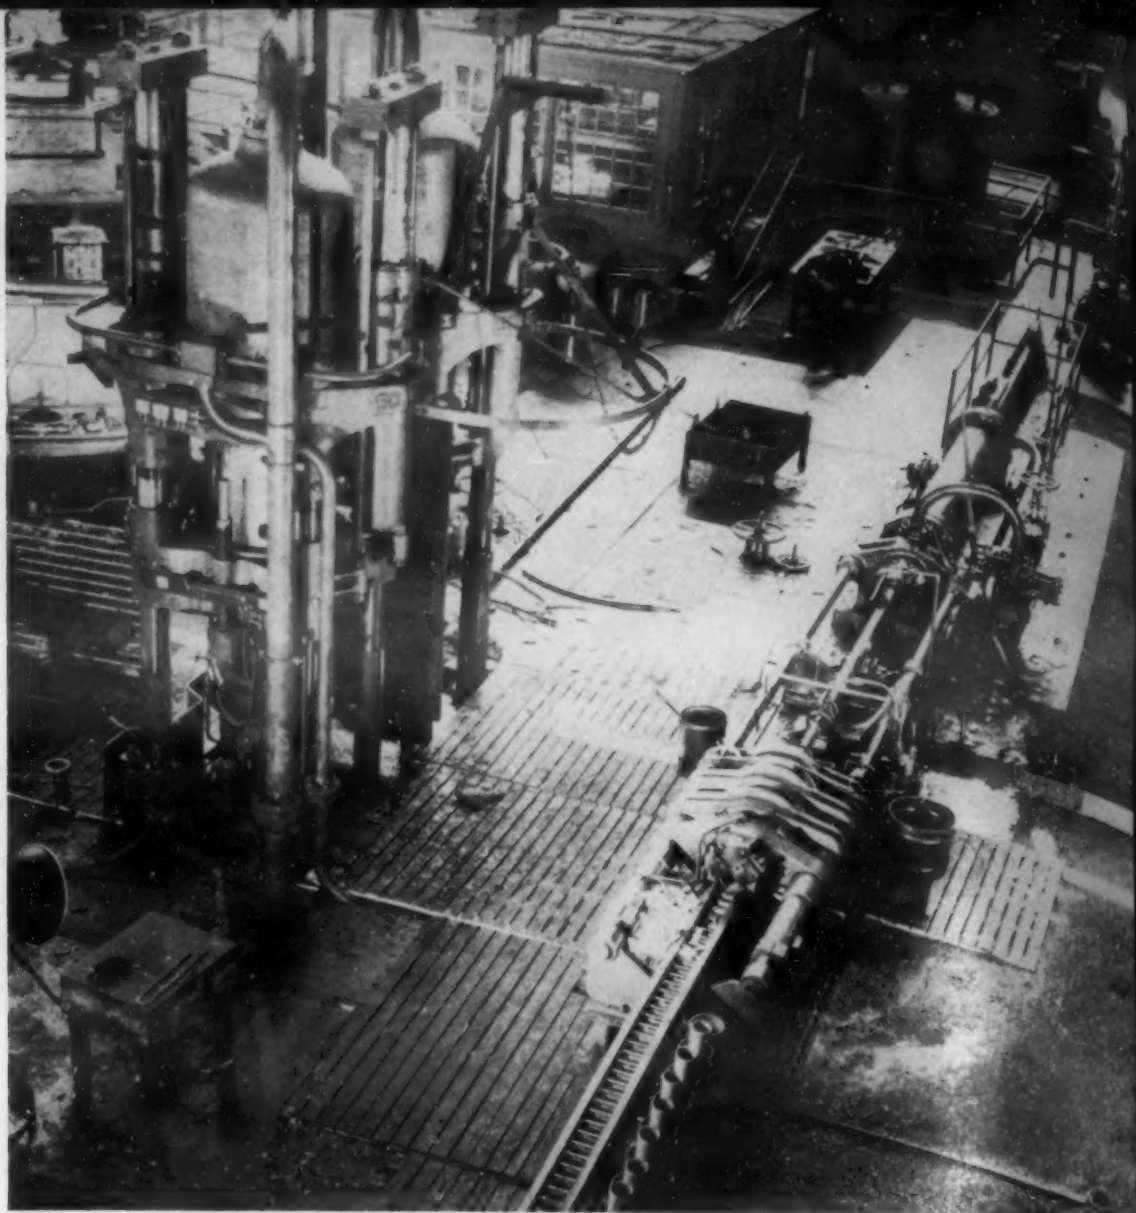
A general view of a hydraulic shell press installation, showing 2 hydraulic piercing presses and 1 horizontal drawing press.
